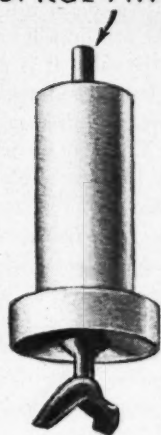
Long sprue pin which makes it easy to handle pattern, and easy to remove when heated. Pattern is sprued and waxed in the tube.
